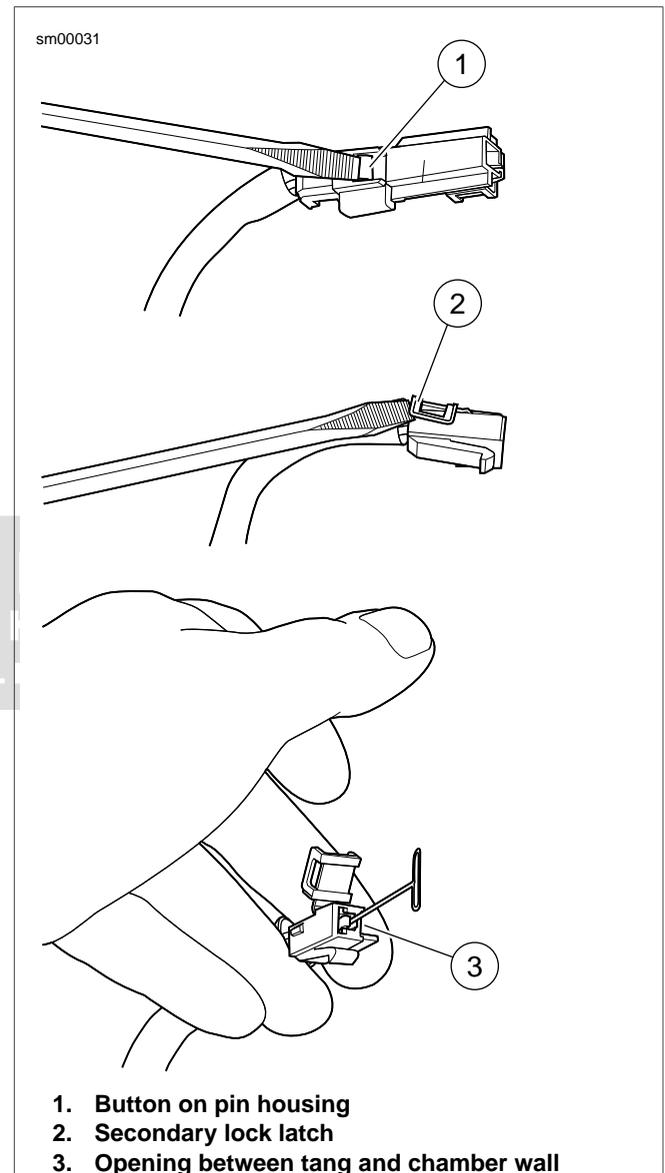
480 Metri-Pack Connector: Remove Socket Terminal
